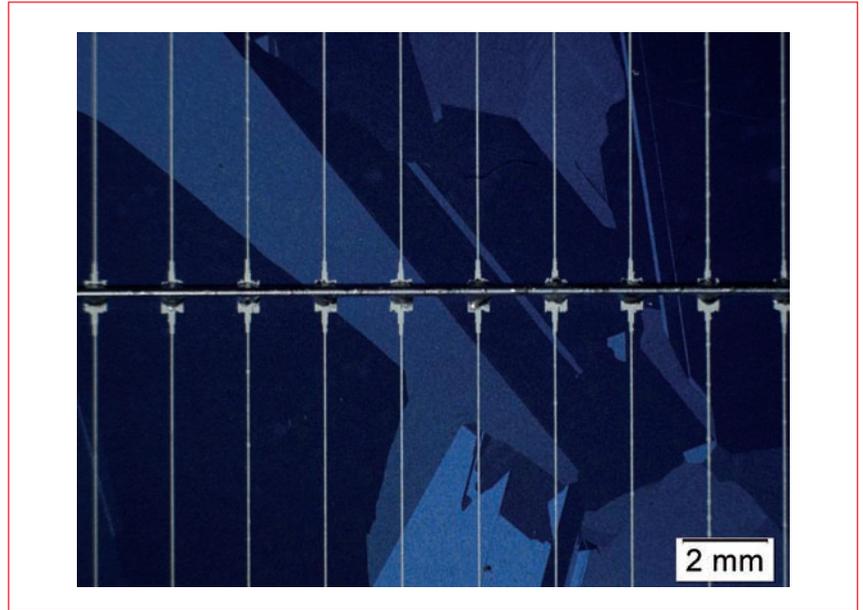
Ag-plated contacts: standard busbar-less design, with soldering pads on the grid fingers.
